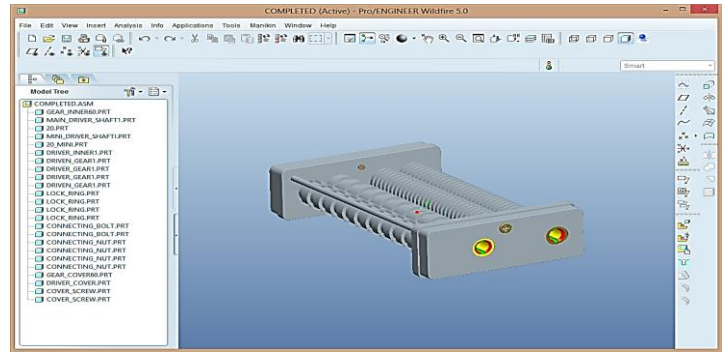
Cutting shaft assembly of the machine as viewed from the driving side
